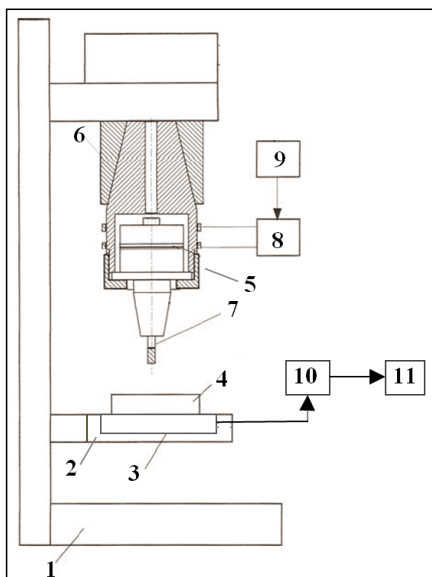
Scheme of the experimental setup for cutting force and torque measurements during drilling operation: 1 – machine construction, 2 – desk, 3 – KISTLER dynamometer platform 9272, 4 – workpiece, 5 – vibration drilling tool, 6 – standard tool holder DIN 6359, 7 – drill tool, 8 – power amplifier, 9 – high-frequency generator Agilent 33220A, 10 – controllers (KISTLER amplifier), 11 – computer.
